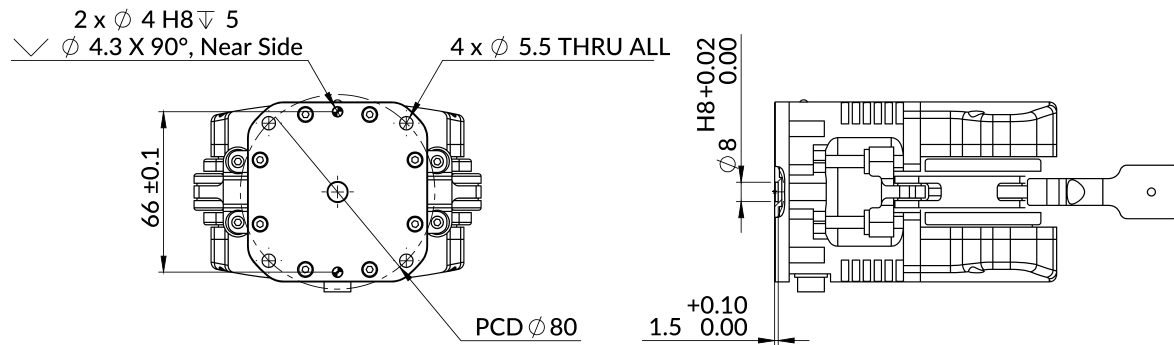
Standard SusGrip-2F Gripper Flange Cap
